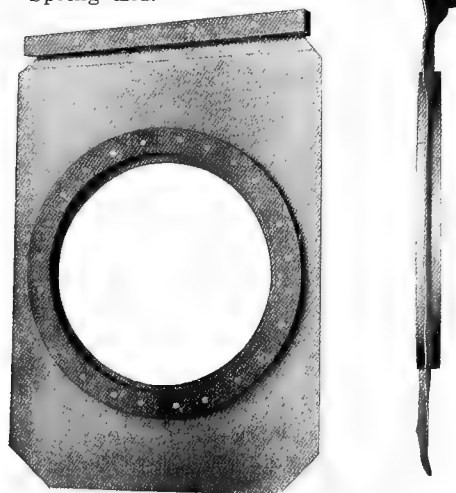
A—Symington Flexible Journal Box Dust Guard.
